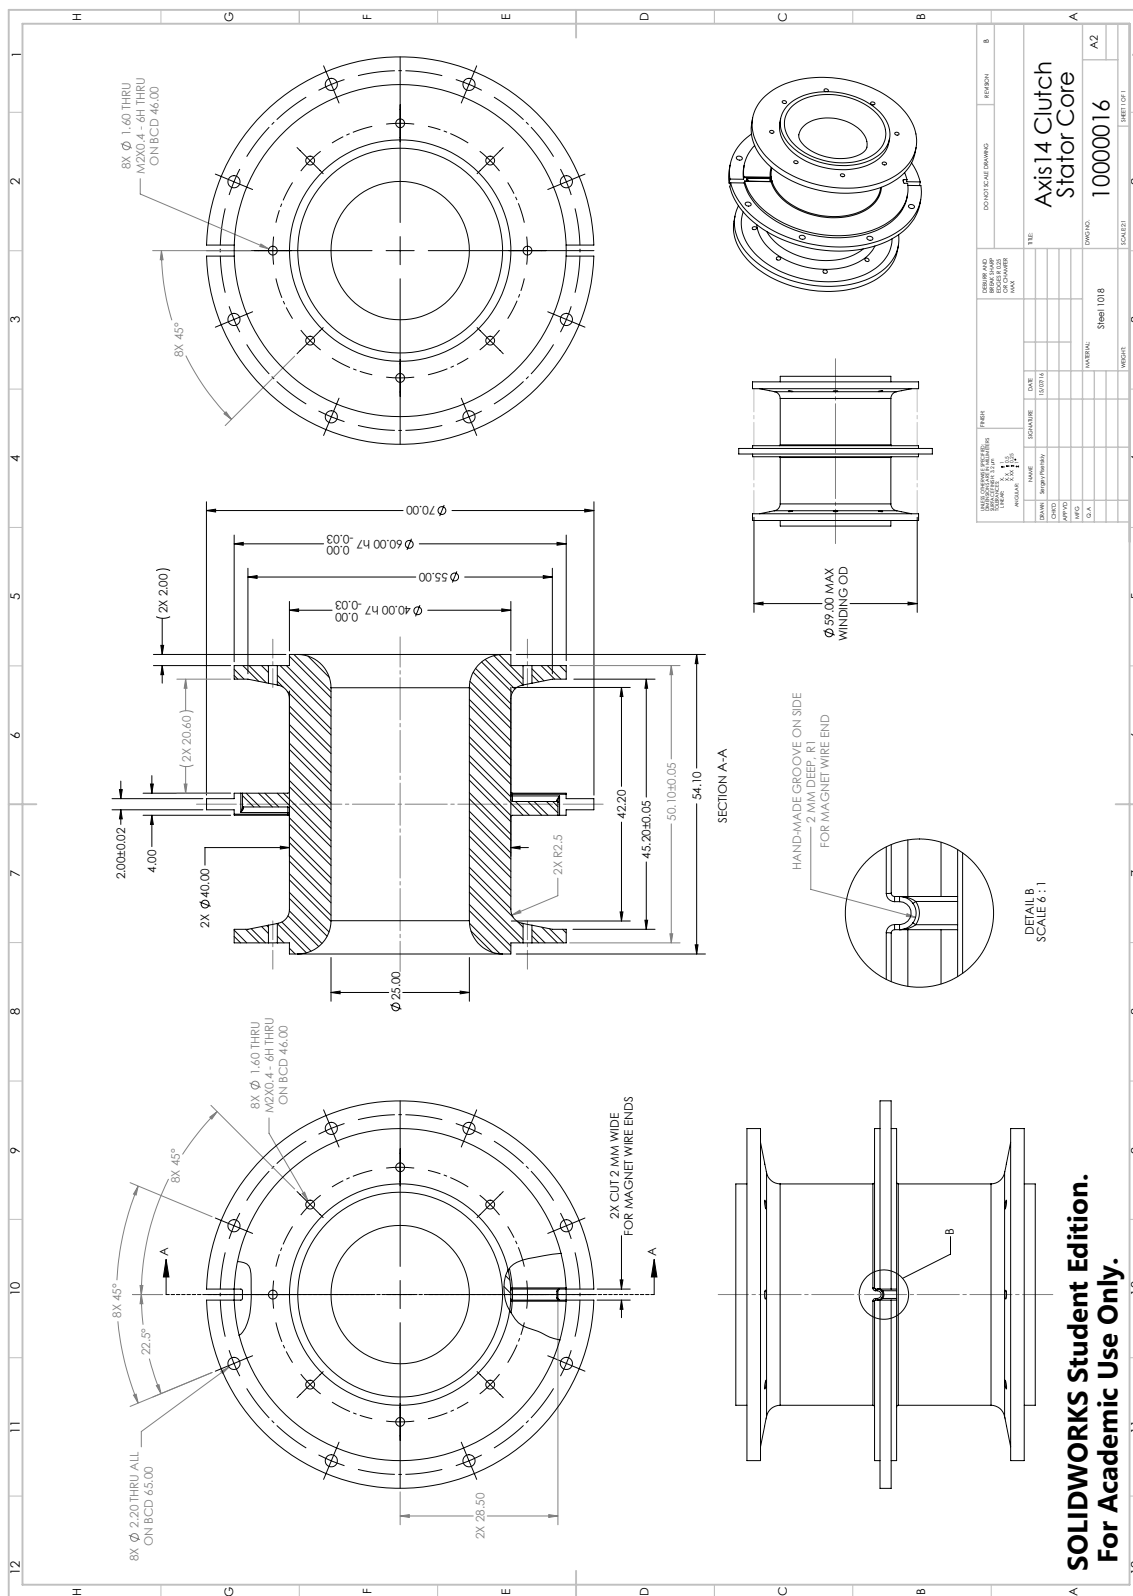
Drawing: Joint 1, 4 clutch stator core.
